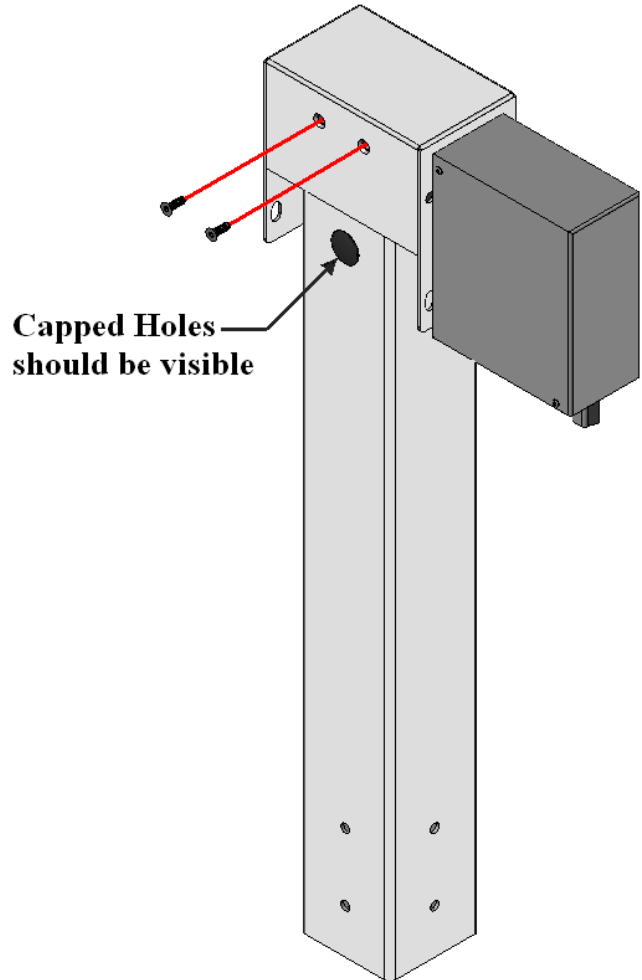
Cable Retractor Box and Top Retractor Mount Assembly
